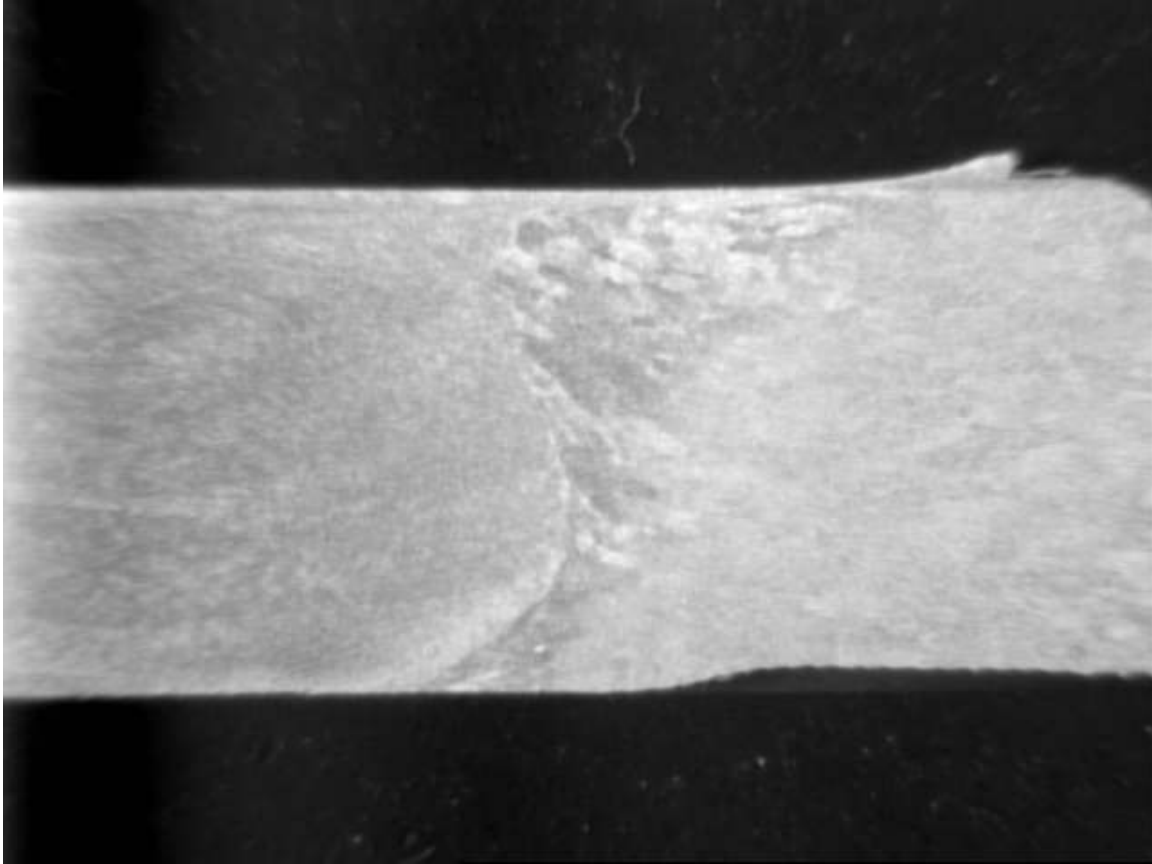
Zoom view of a macro taken from a wide probe weld (1400rpm, 5.2ipm). The advancing side of the weld is shown.
